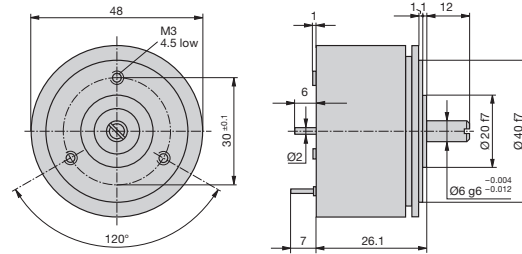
KINAX 3W2 with special drive shaft at front and at rear. At front: Ø 6 mm, length 12 mm. At rear: Ø 2 mm, length 6 mm.
